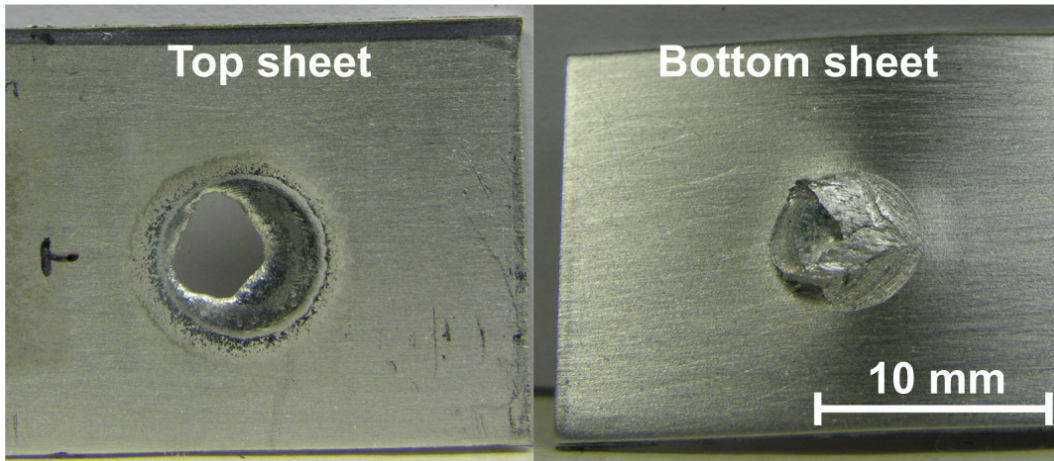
Button pullout mode fracture in a DSA spot weld nugget produced with a 1.9 kW welding power and 3 second weld time.
